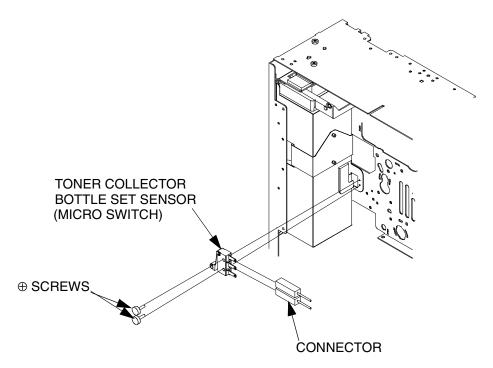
Removal of the Toner Collector Bottle Set Sensor
